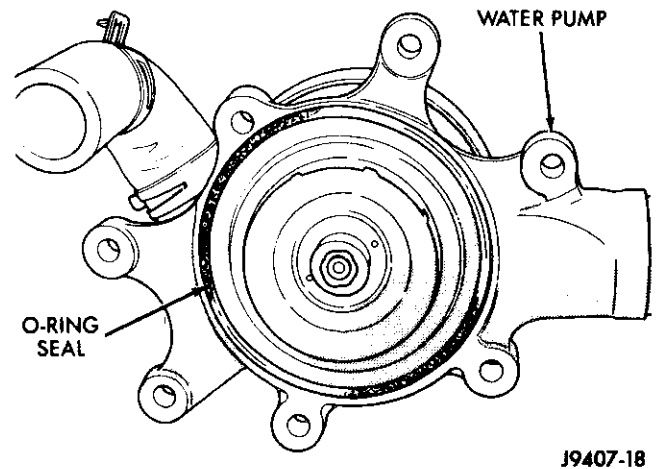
Water Pump O-Ring Seal—8.0L V-10
